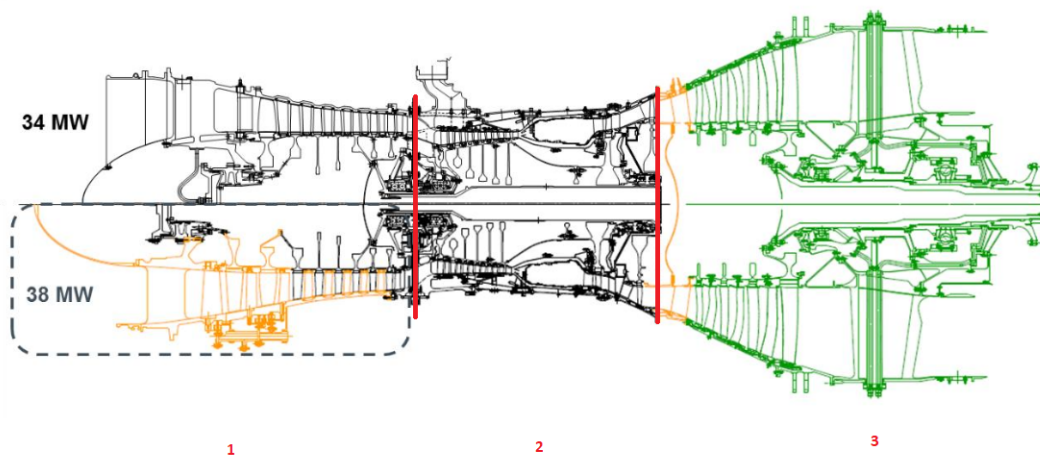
Cross section of gas turbine SGT A-35 for 34 and 38 MW showing the main parts: 1 - compressor, 2 - combustor and 3 - expander. Adapted from [6]
